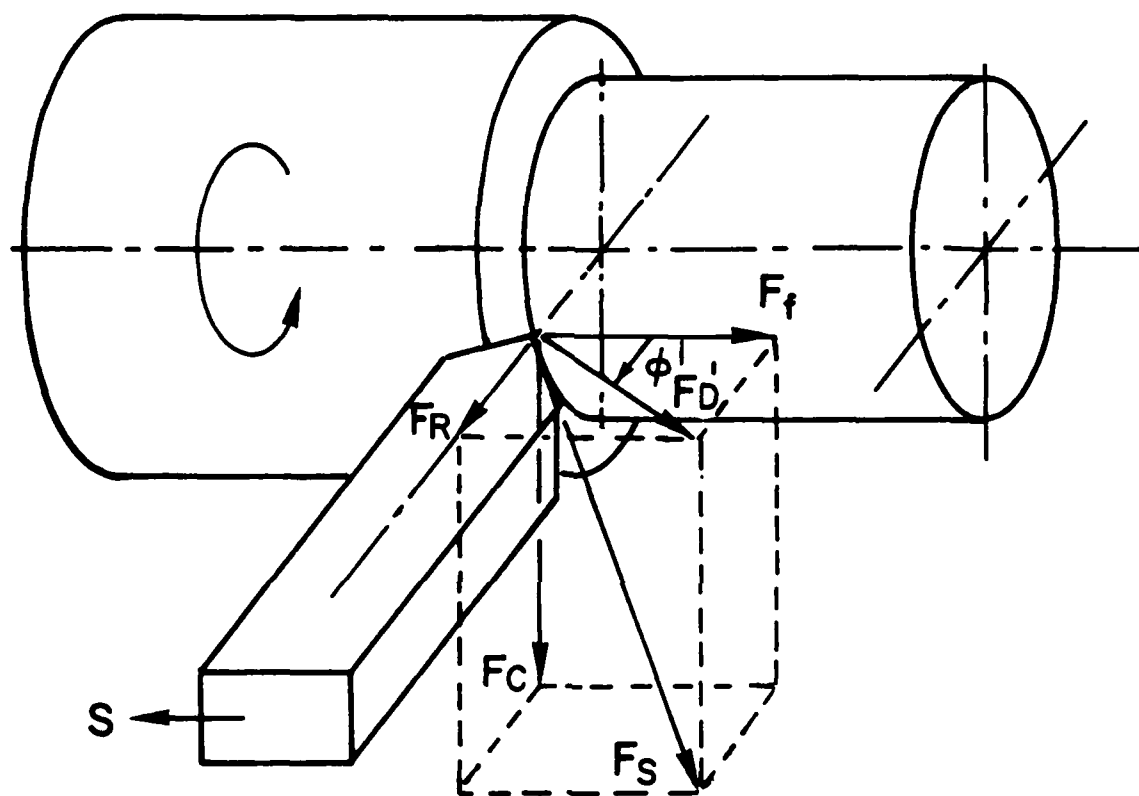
Geometry and cutting forces for a lathe tool. F_c is the cutting force, F_f is the feed force, and F_r is the radial force.
